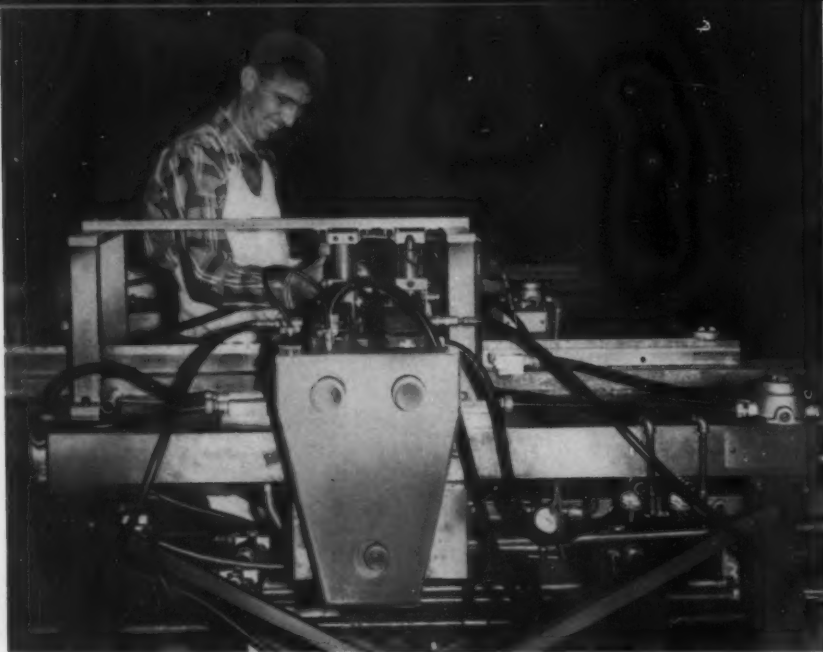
The equipment is built around commercially available components. Two vertical cylinders in front of the operator actuate clamping rollers.
